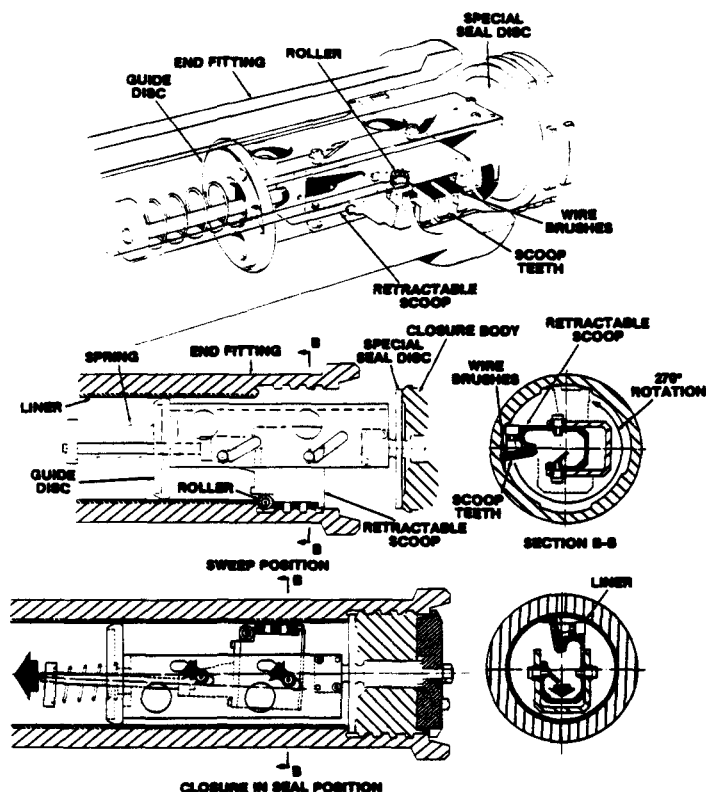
CRUD TOLERANT FUEL CHANNEL CLOSURE
